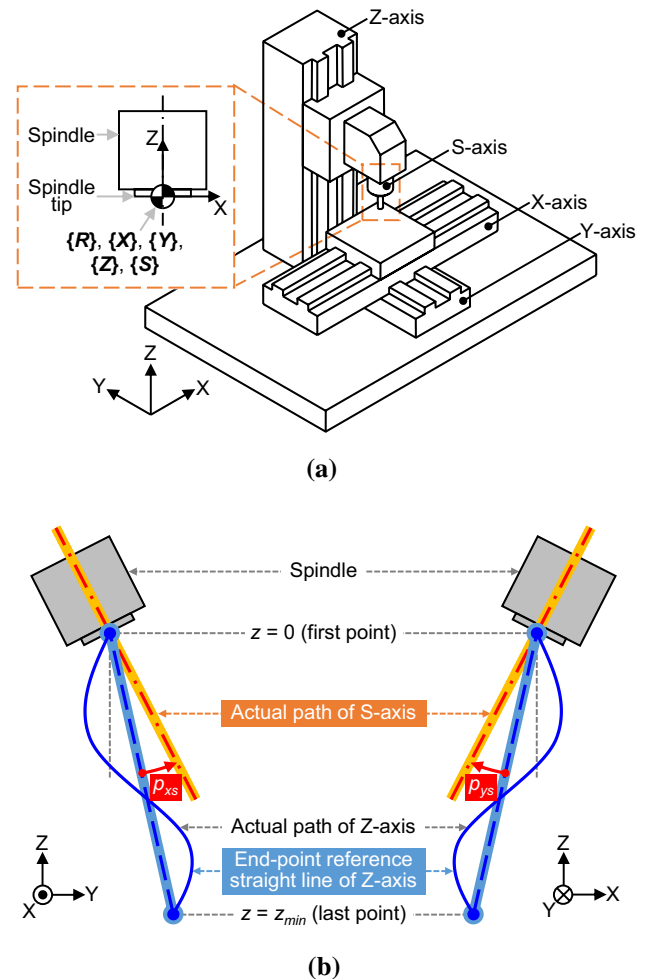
Experimental machine tool and end-point reference straight line of the Z-axis. a Kinematic structure of the machine tool. b Parallelism error in the YZ and ZX planes
